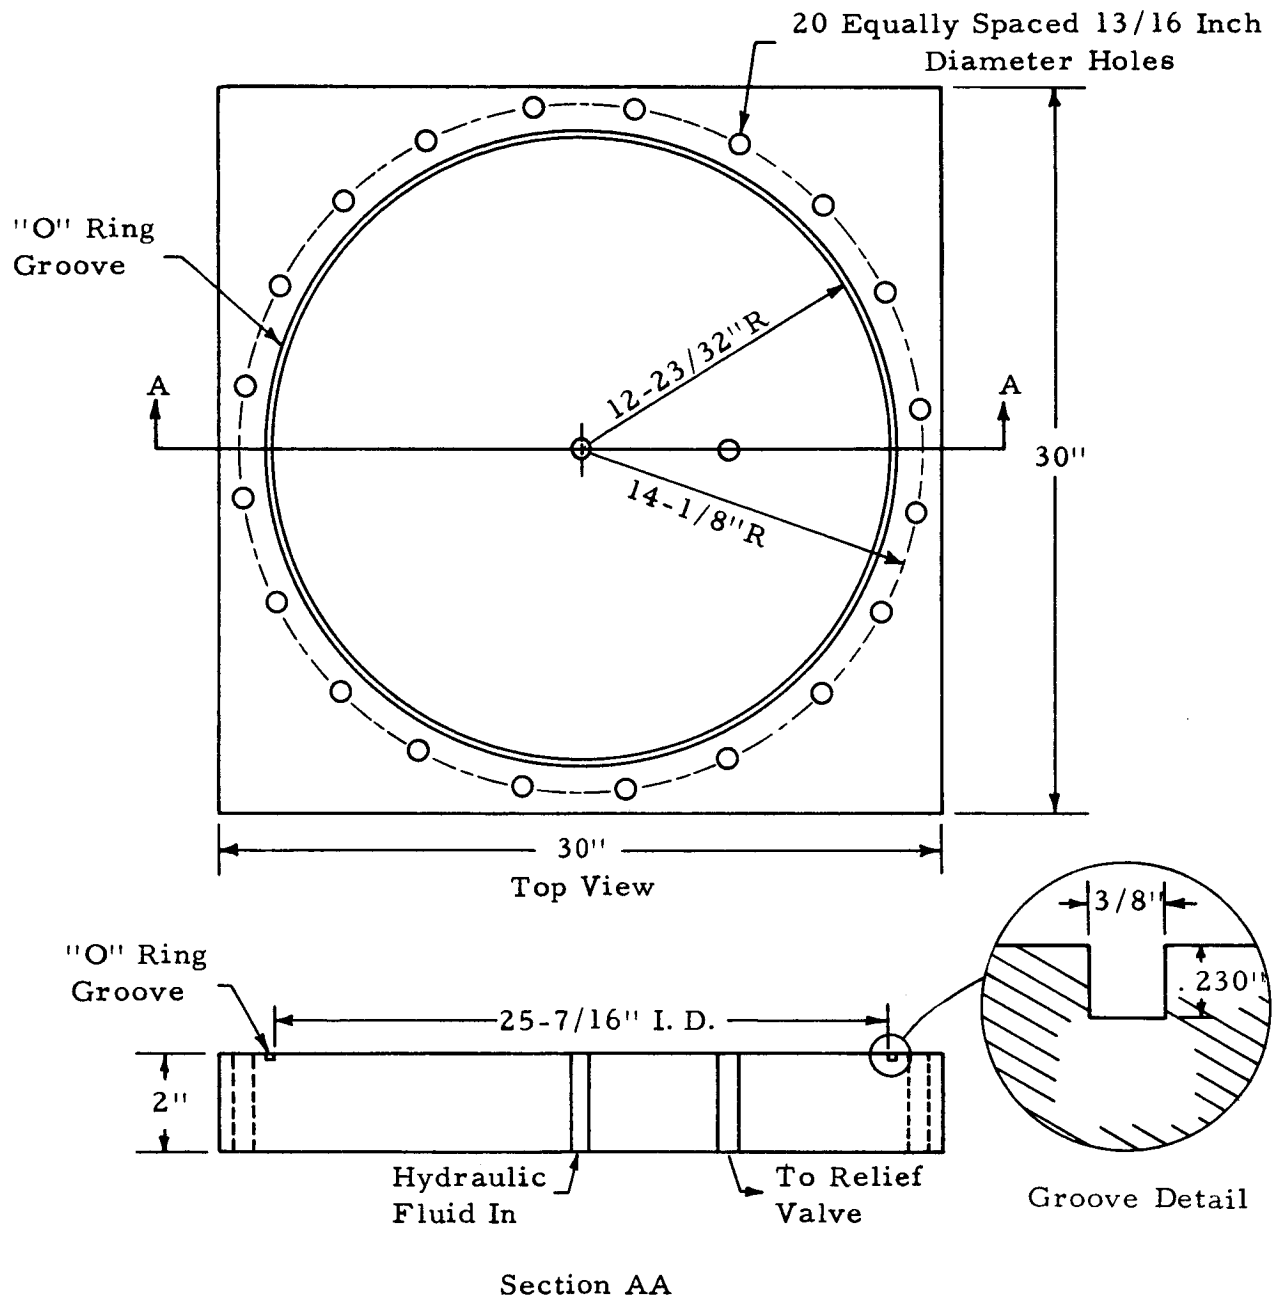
BOTTOM DIE OF HYDRAULIC BULGE FIXTURE
